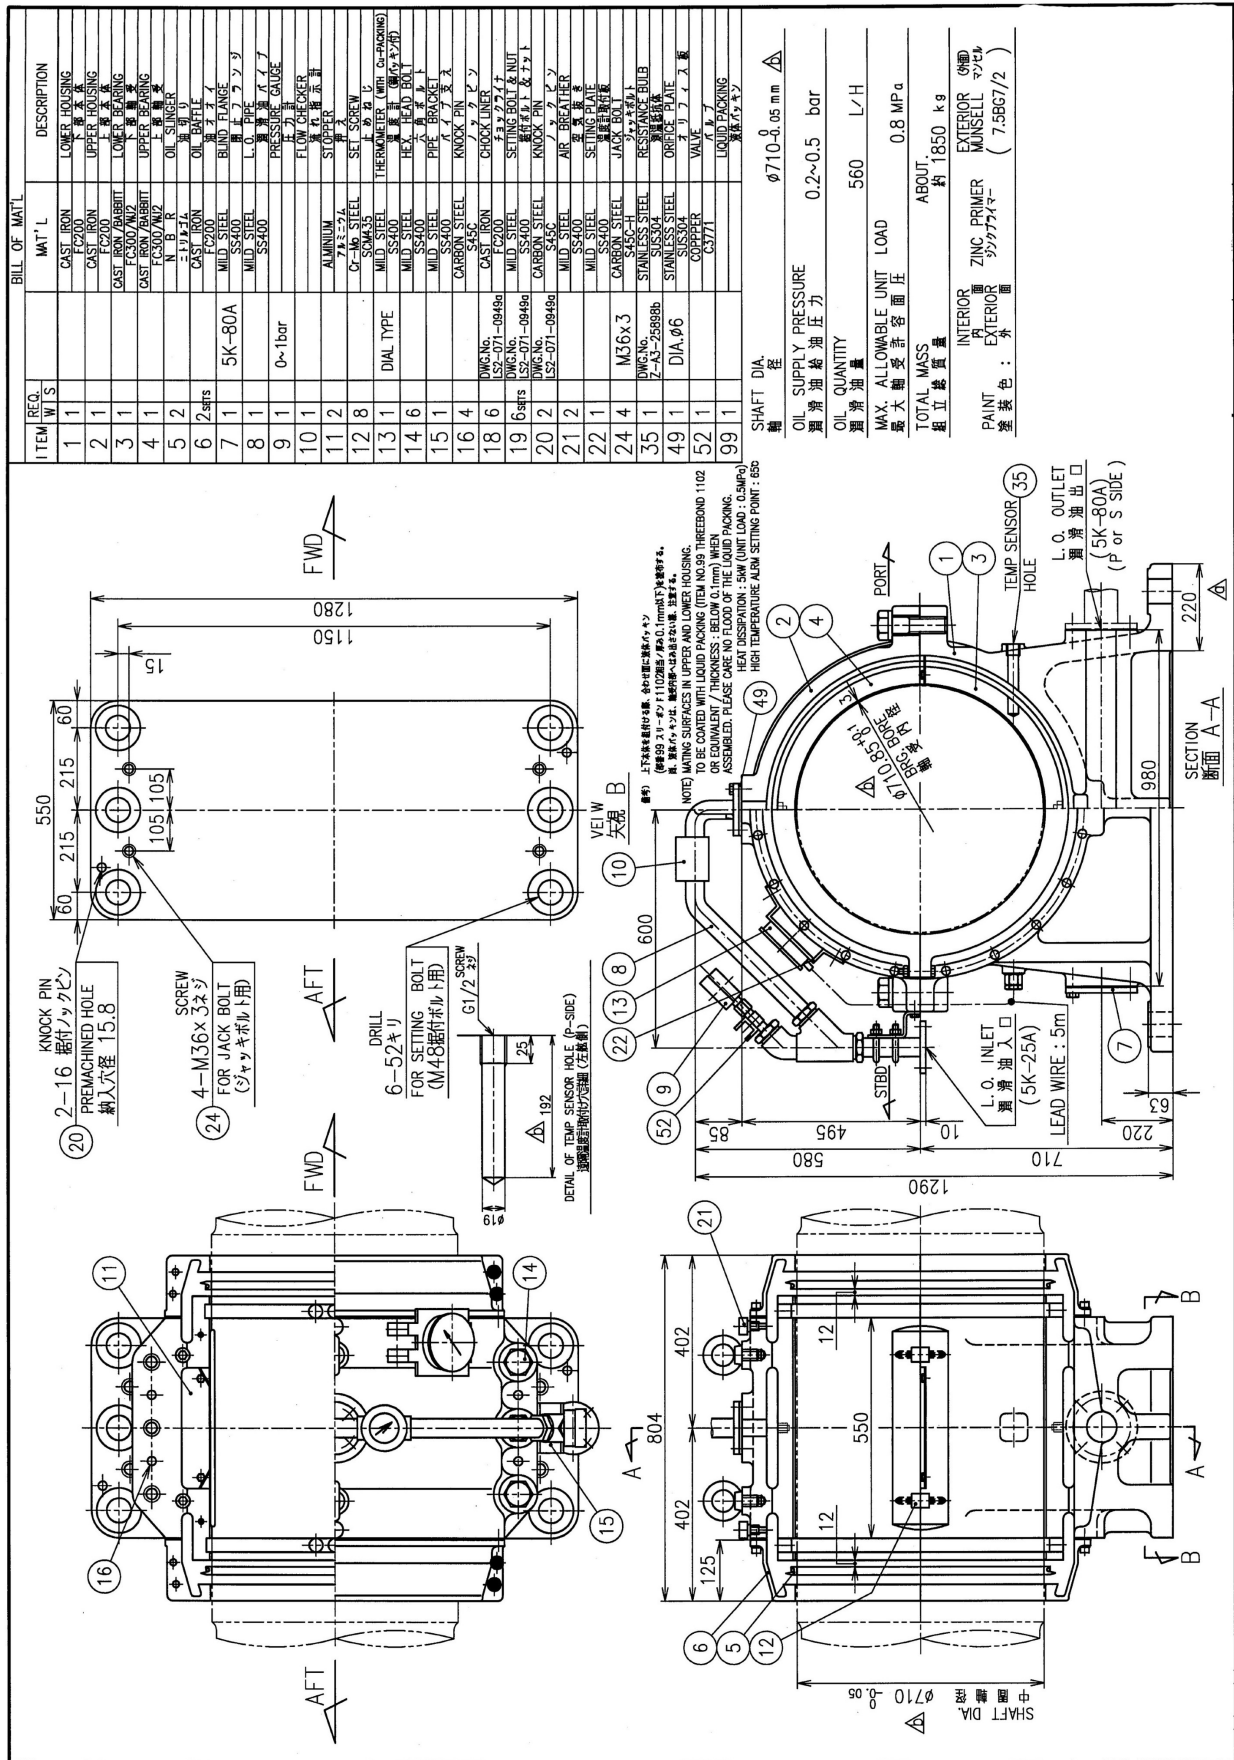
INTERMEDIATE SHAFT BEARING DRAWING
